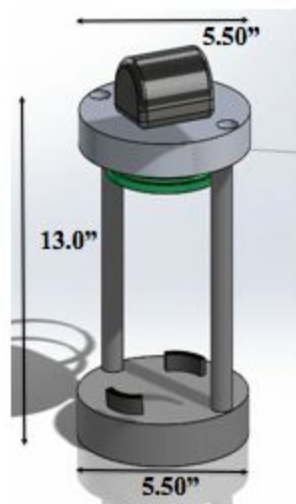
Clamp Hold Container Opener drawn using SolidWorks
